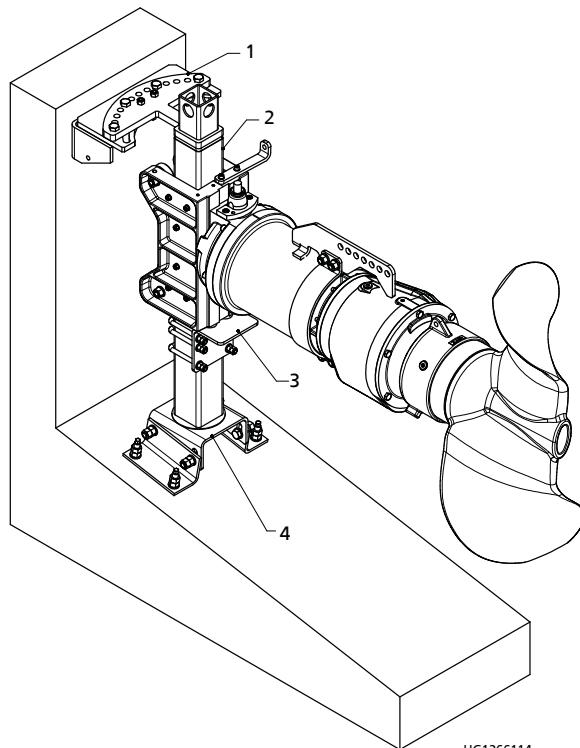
Installation example: Amaprop mounted on tank wall and horizontal tank floor
